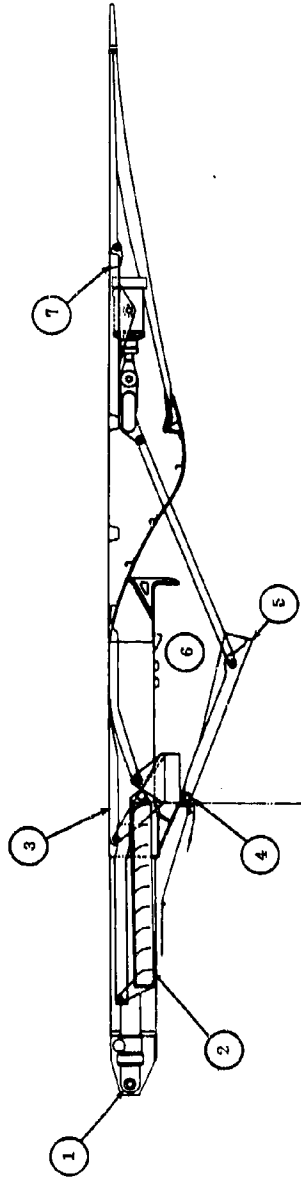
GE4 EXHAUST NOZZLE THRUST REVERSER AND SOUND SUPPRESSION CONFIGURATIONS
